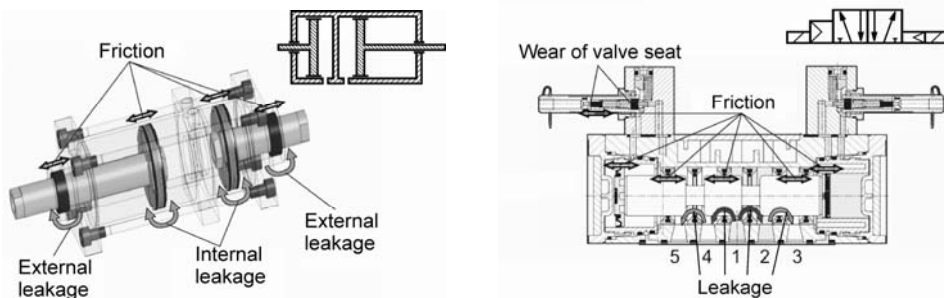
Forms of wear at the welding cylinder and the pneumatic 5/2-way valves
